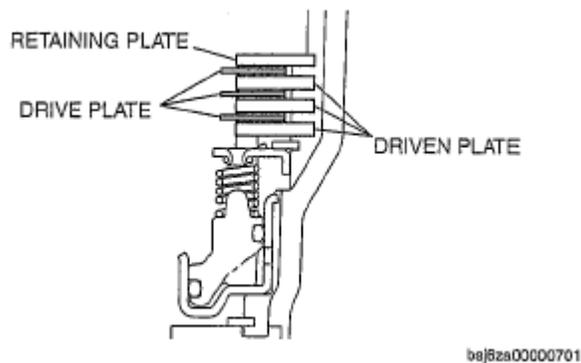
Identifying Driven Plates, Drive Plate And Retaining Plate
